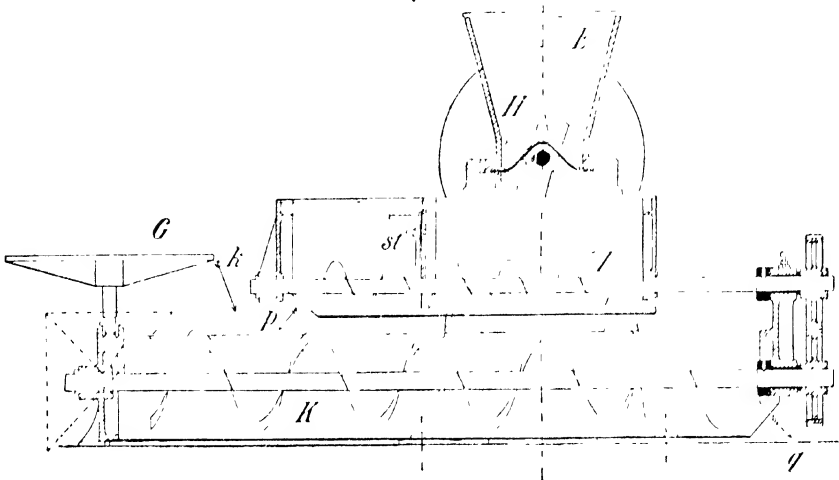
Pitch cracker with discharge and mixing screw. Longitudinal section.
